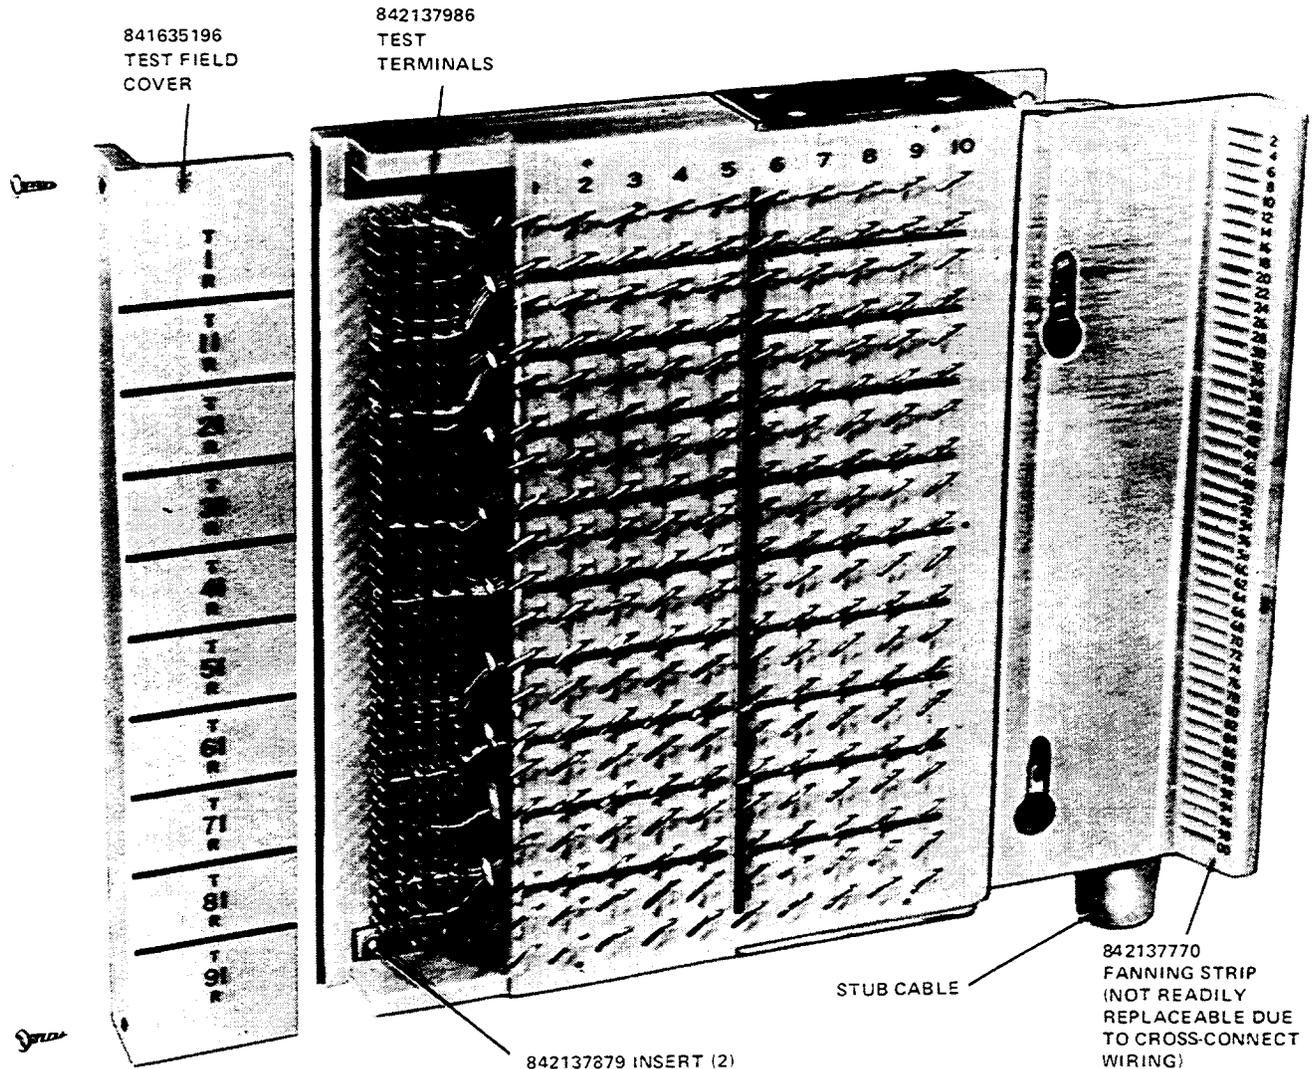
305-Type Connector, Test Field Cover and Terminal Guard Removed
